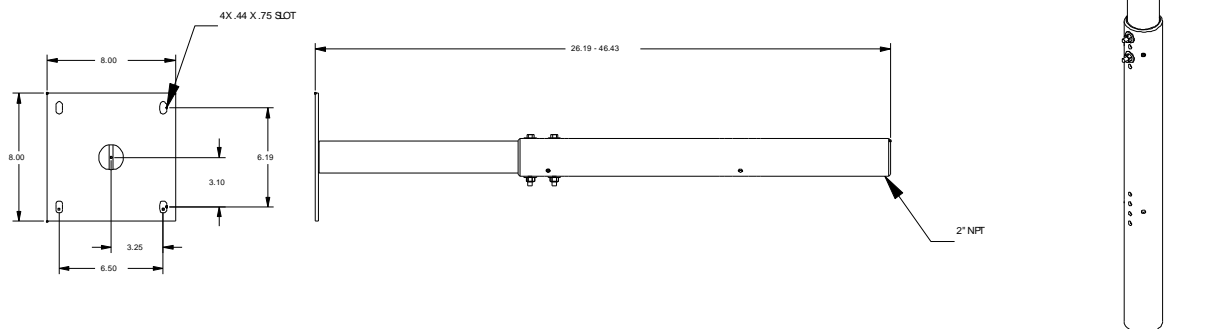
CMA-260 COLUMN TUBE AND CEILING PLATE
